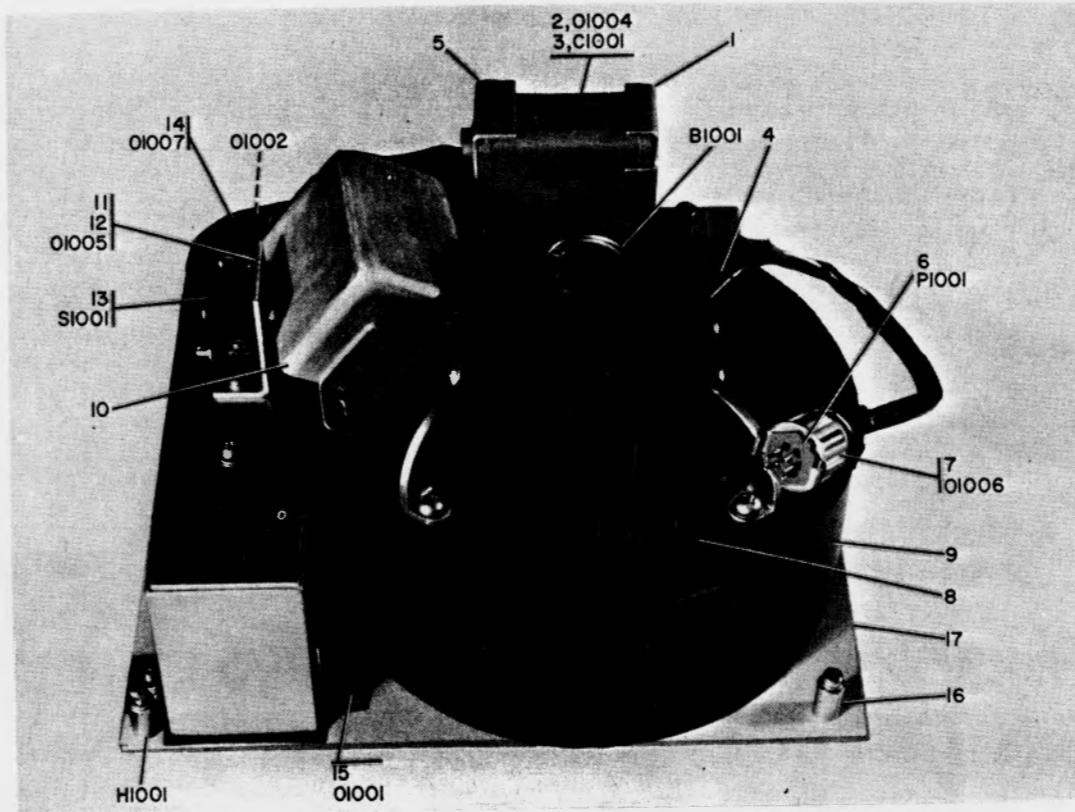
AM-1565/URC, Amplifier Blower Assembly
